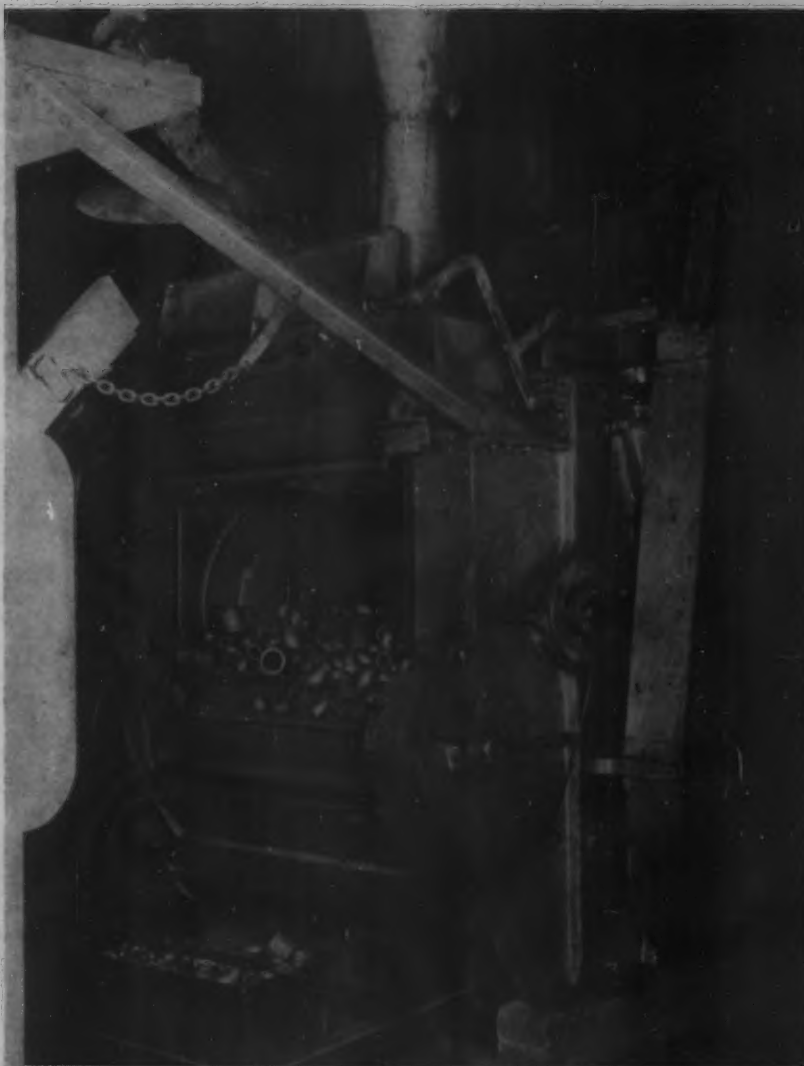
Wheelebrator at the Thomas Devlin Mfg. Co., used for cleaning pipe fittings made of cast, gray and malleable iron. These castings will be galvanized.
